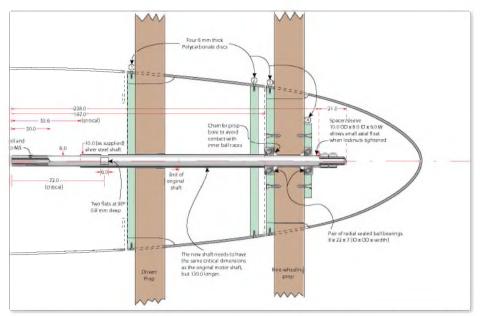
Wyvern simulated CR prop design Mk.6. The 9 inch long spinner and large overhang of the long shaft extension are evident in this assembly drawing
